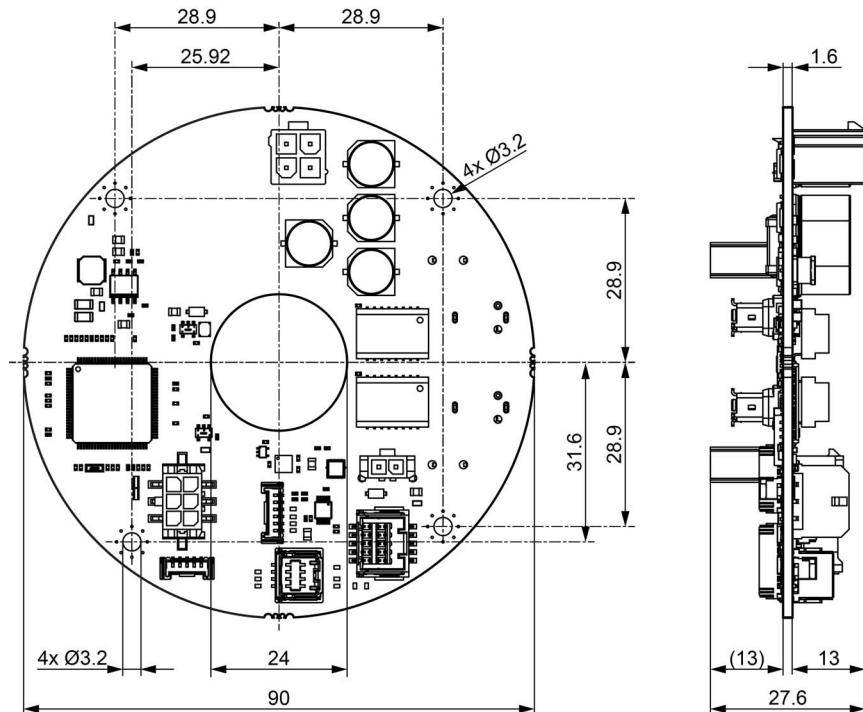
EPOS4 Disk 60/12 EtherCAT (688777) – Dimensional drawing [mm]
